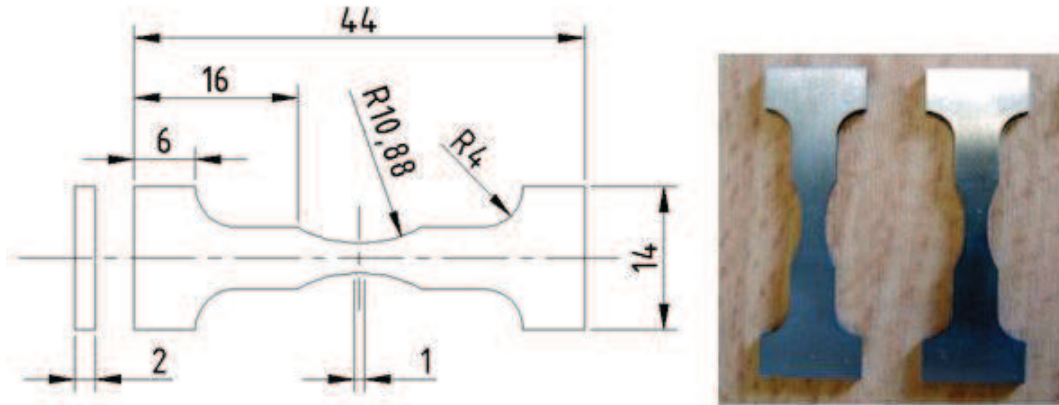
The plate specimen geometry size for fatigue test under load-controlled
